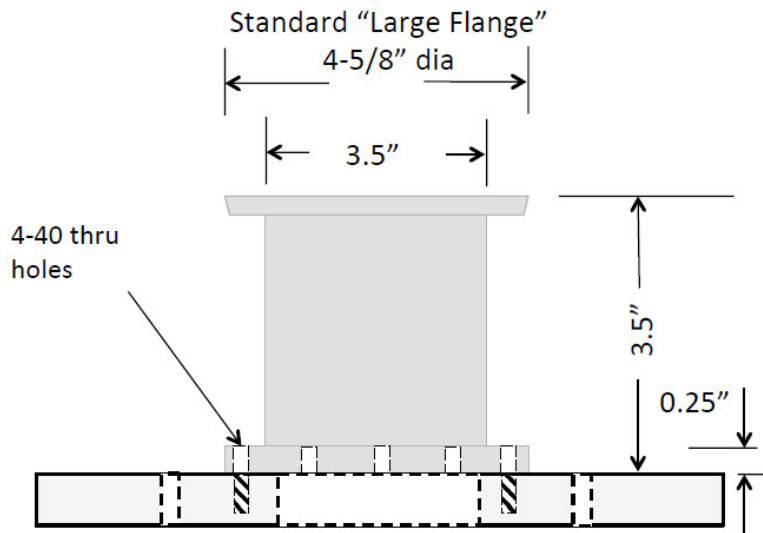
Top plate assembly with an s.s. spool with a mating flange connection to the top plate and the "Large Flange" of the probe slide seal assembly.
